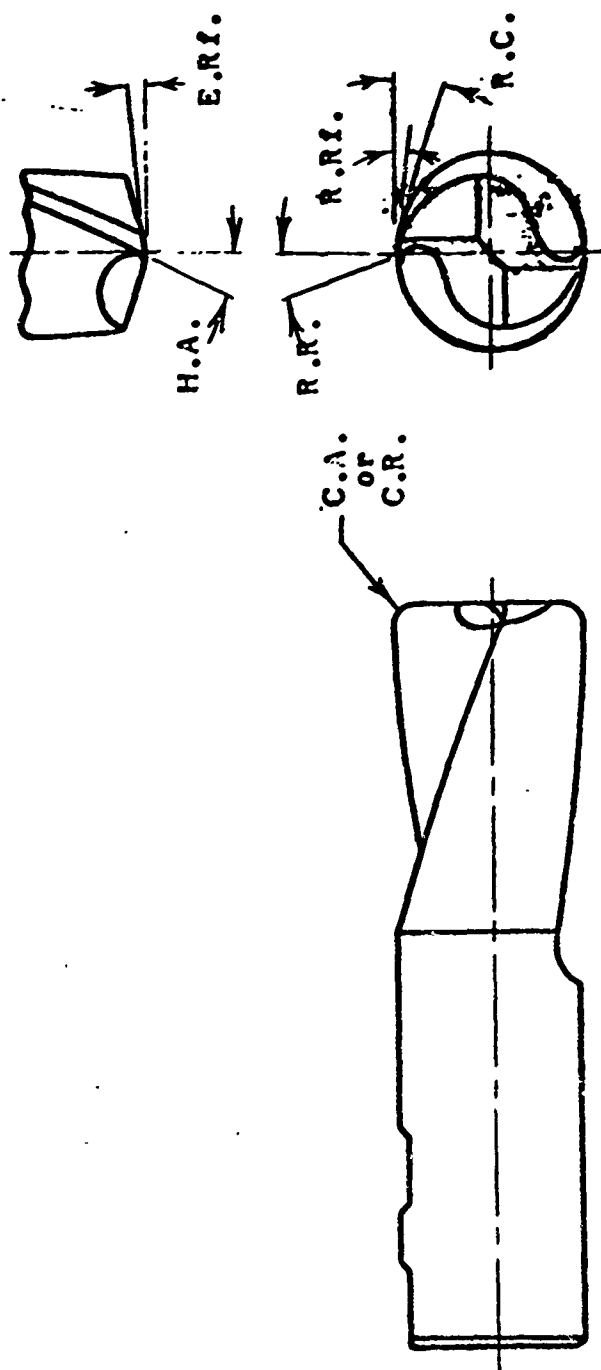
TOOL NOMENCLATURE FOR END MILLS
